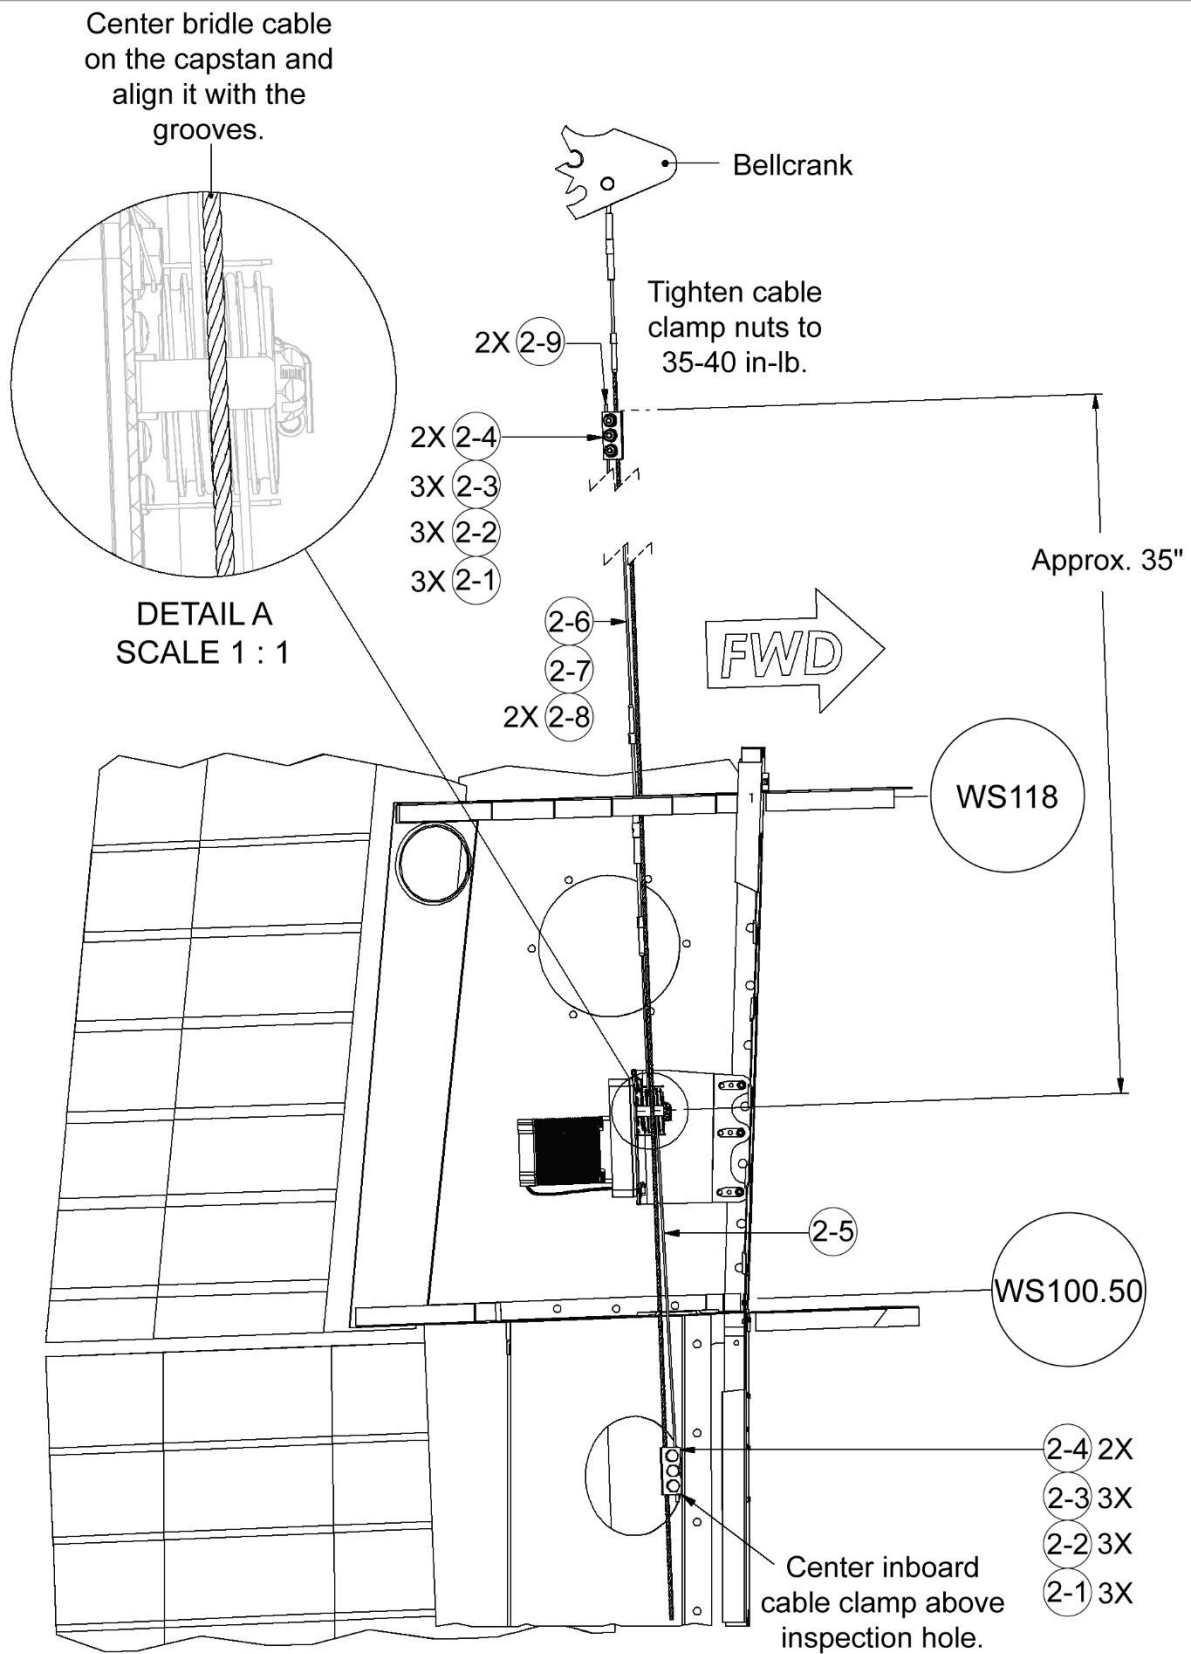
Attaching Bridle Cable to Aileron Control Cable
